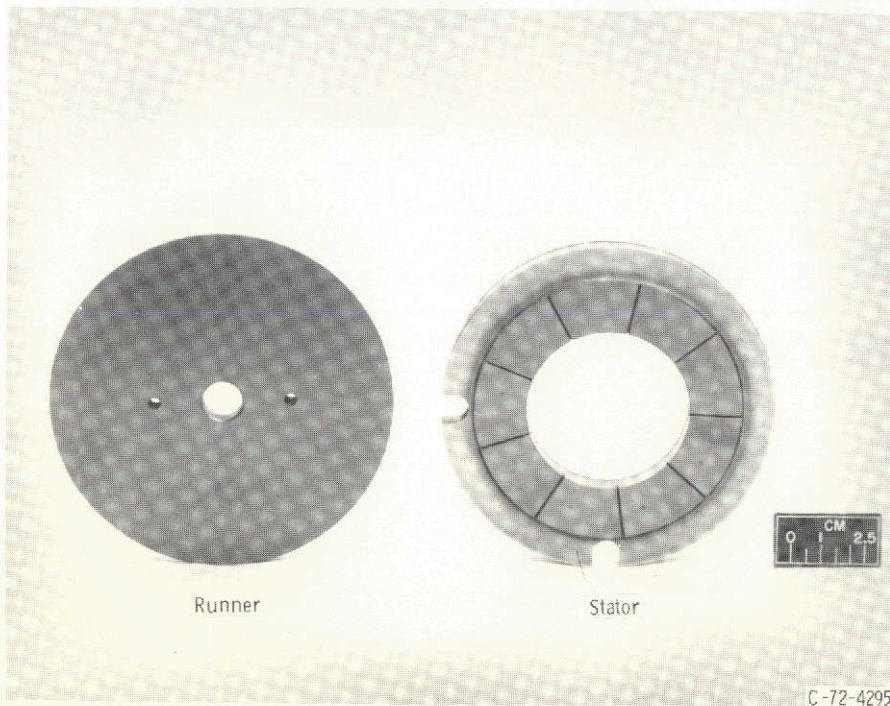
Plasma sprayed  $\text{Cr}_2\text{O}_3$  coated Rayleigh step thrust bearing stator and mating runner before test.
